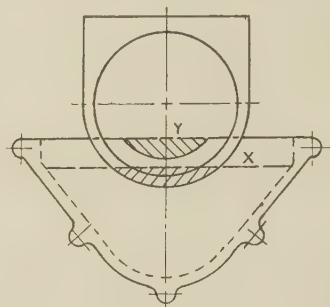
FIG. A.—Secondary-Channel and Bottom-Casing Assembly.
